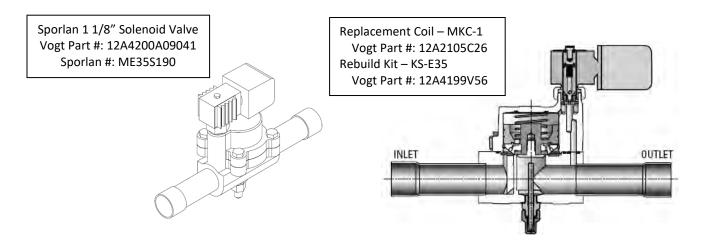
"D" & "X" Solenoid Valve (Sporlan)
